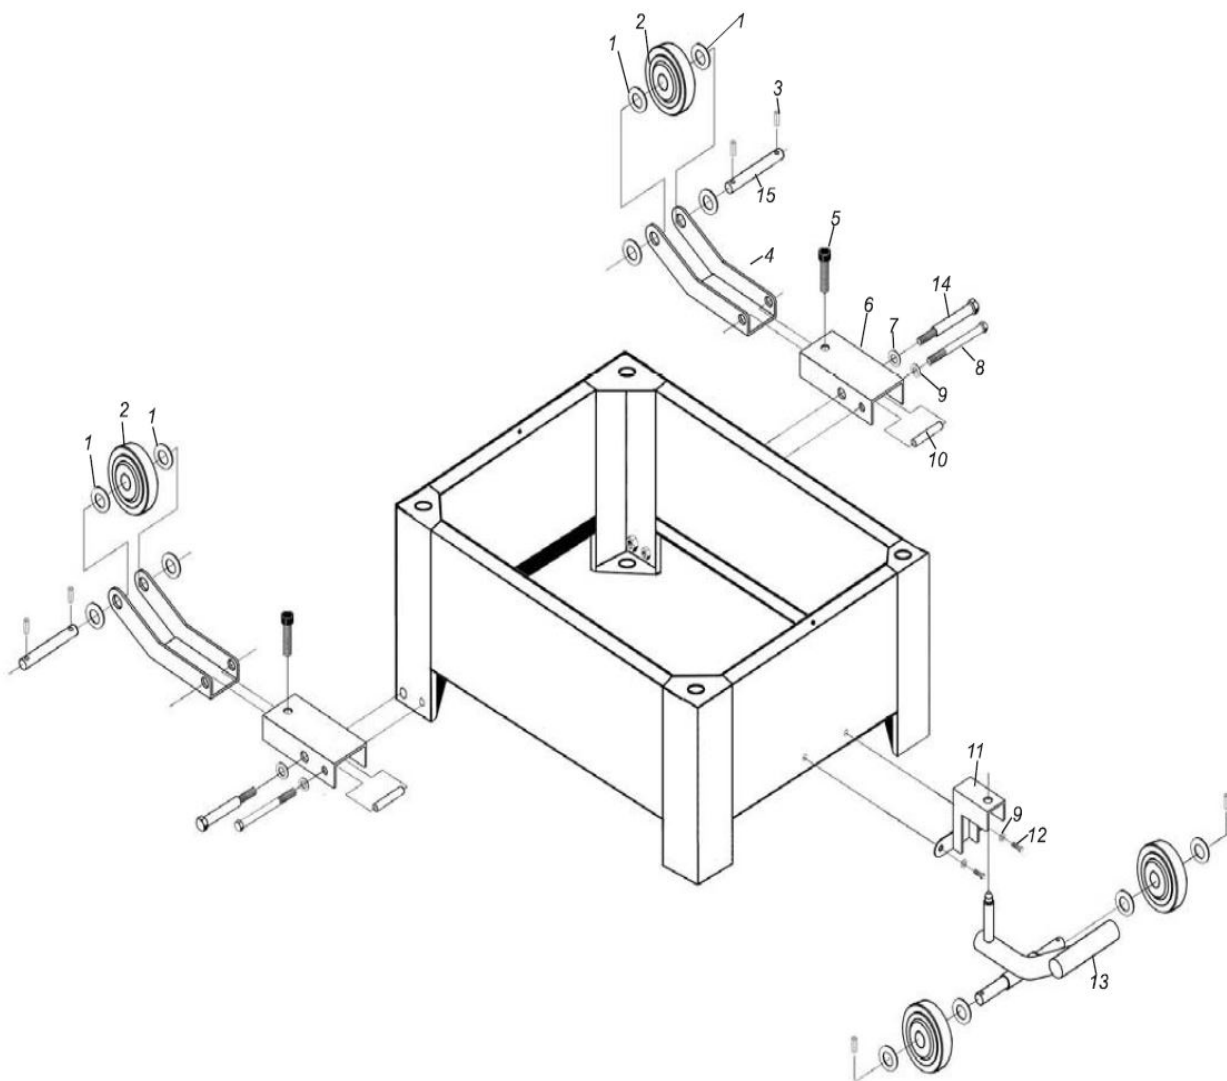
Spare parts drawing 6 - Table router TF 190 E
